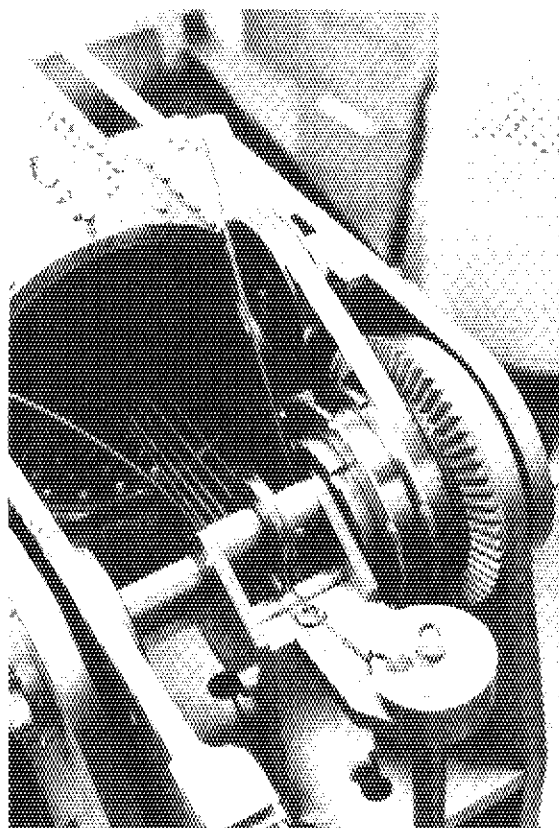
Assembled winding reel for handle grip motion at the part of slave arm shoulder of the type A 100 standard manipulator
